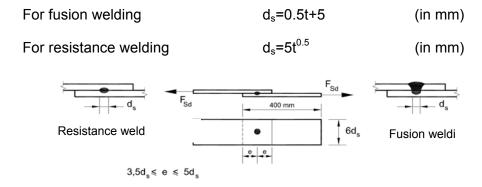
Test specimen for shear tests of spot welds
